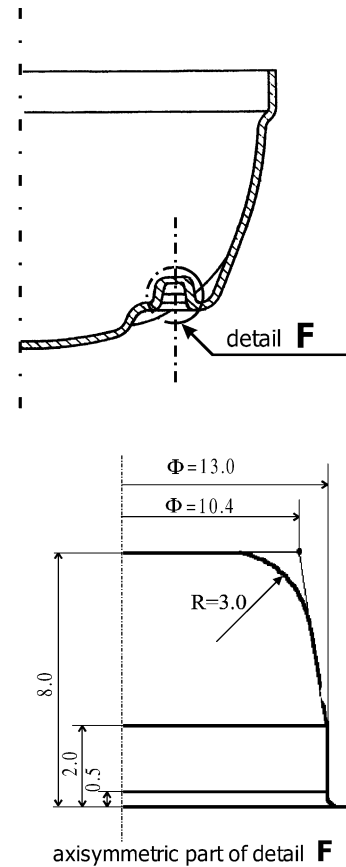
Compressor cover produced by stamping factory HYDRAL. Dimensions are given in millimeter.
